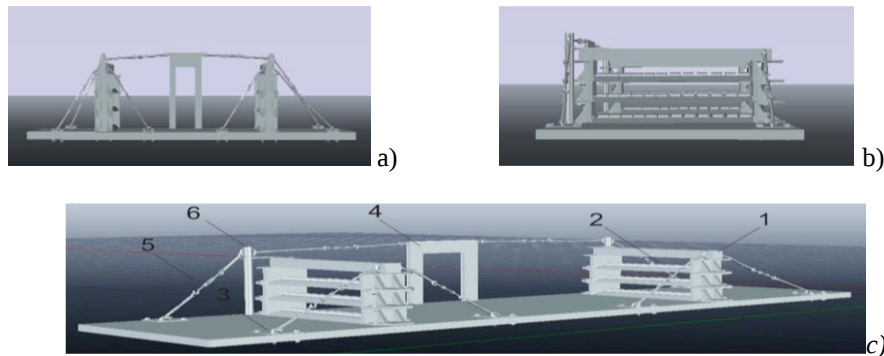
3D Model of the Removable Equipment of Rail Transport Platforms in the AutoCAD Software Environment: 1) Support post; 2) Roller supports; 3) Platform attachment; 4) Side support; 5) Turnbuckle; 6) Tension post.
